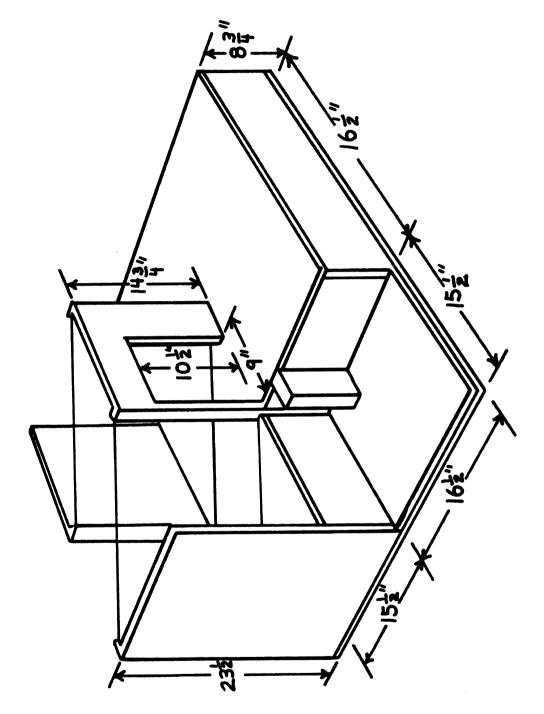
Right Hand View of Beam Splitter Mount Showing Dimensions.
